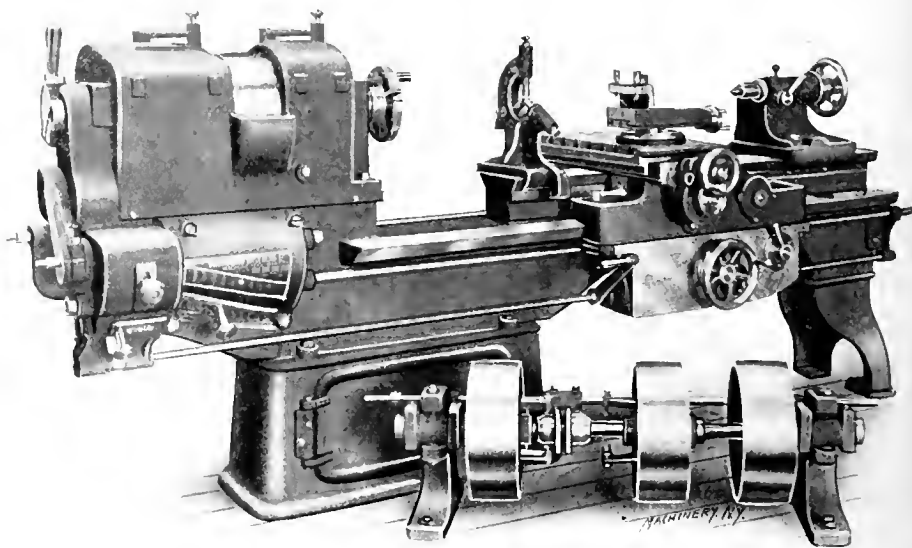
Drummond Bros. 18-inch Swing Patent Gap Bed Engine Lathe, All-gear-drive.
